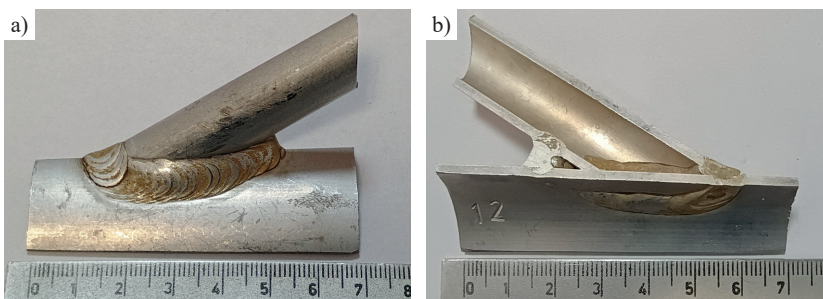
MIG connection of pipes with a wall thickness of 2 mm: a) weld face; b) joint cross-section
